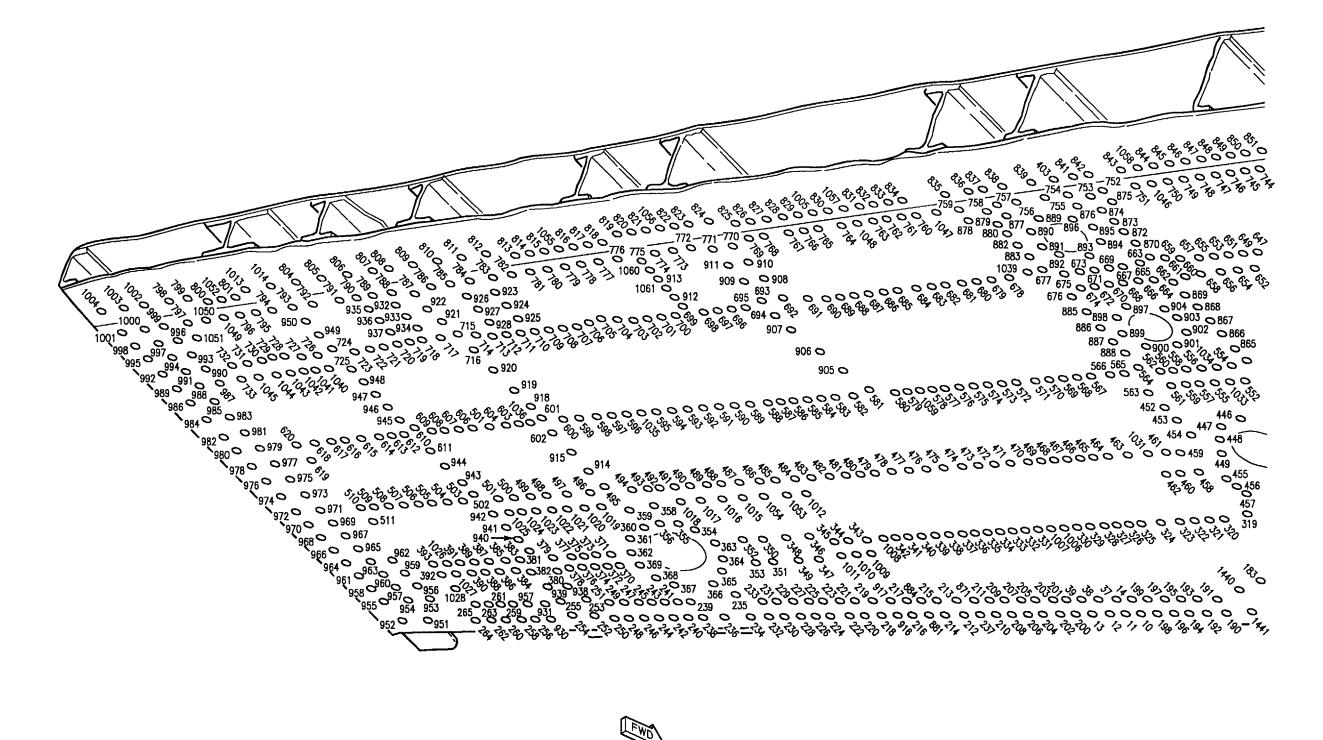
Inner Wing Skins Hole Numbers (Sheet 6)
